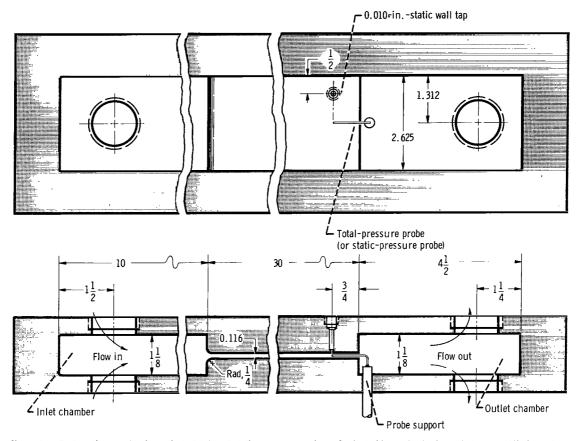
Test section used to investigate total-and static-pressure probes. Probe holder and actuator not shown. (All dimensions in inches.)
